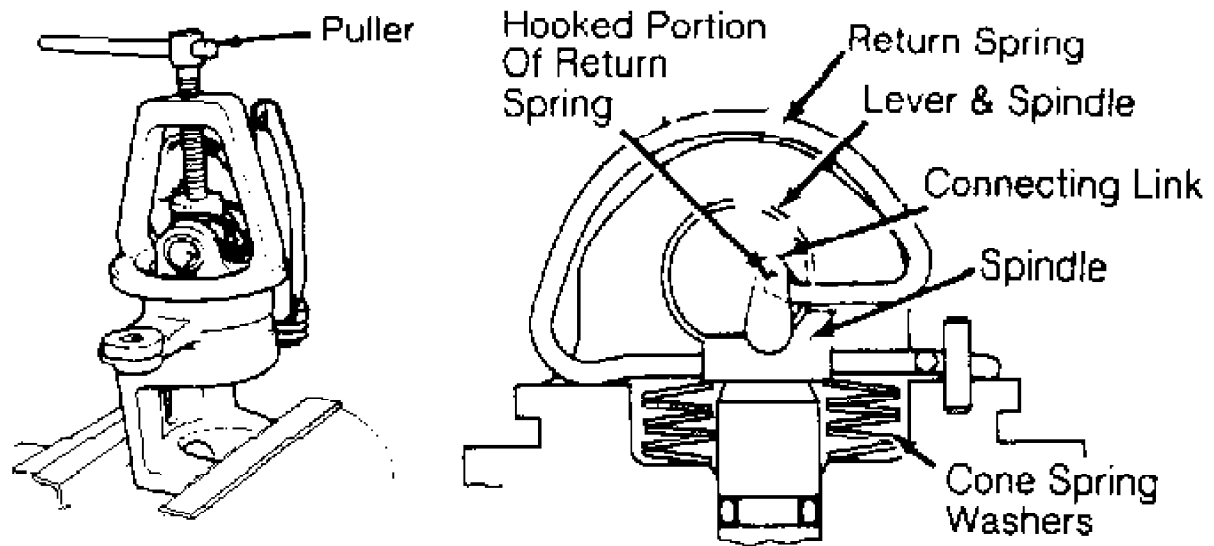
Removing & Installing Caliper Lever & Spindle (Loyale)
